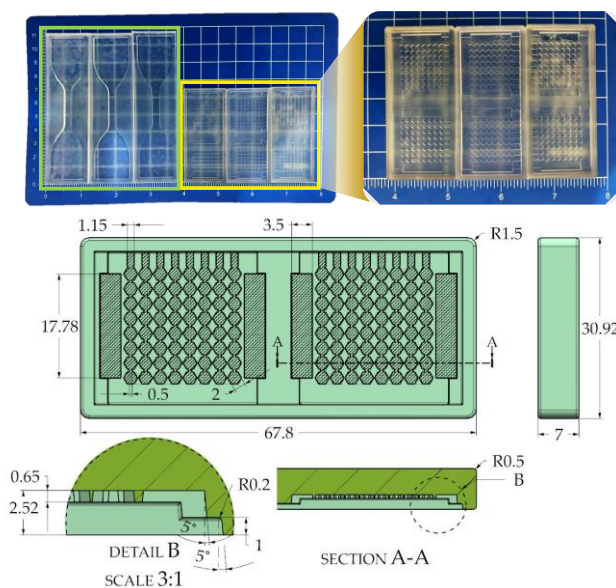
(a) Photos of three molds for tensile specimens (green box) and three initial two-cavity molds (yellow box) printed by Low-Force Stereolithography (x- and y-units show dimensions in inches and
